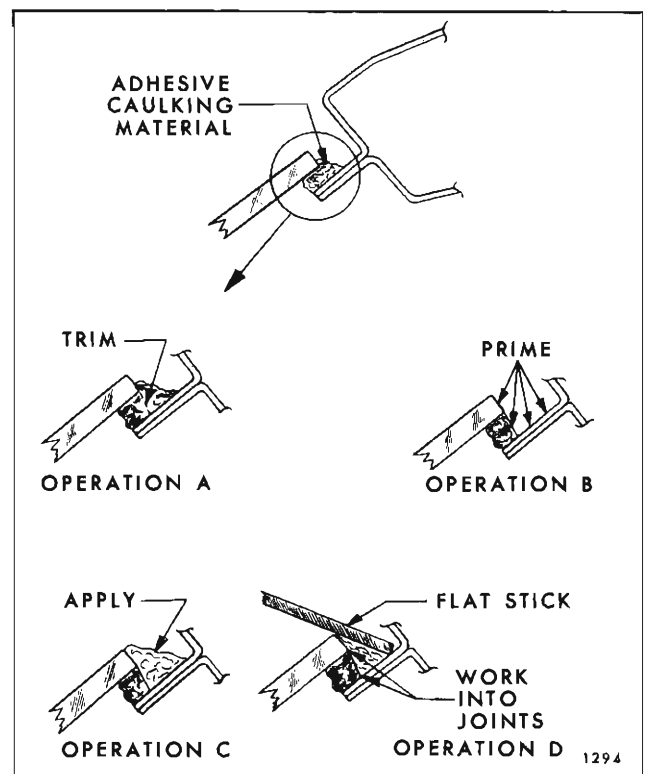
C13—Correction of Adhesive Caulked Glass Installation Waterleaks
